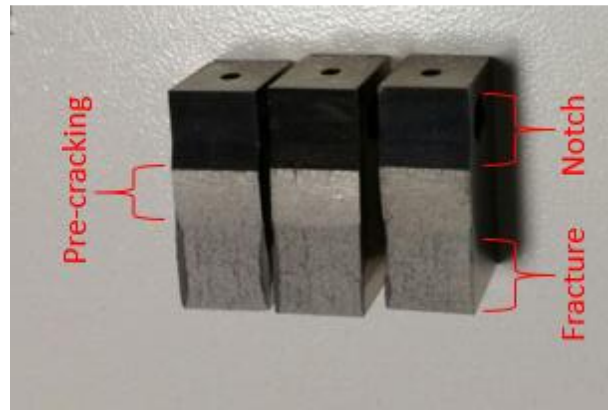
Crack front on fractured Ti6Al4V samples (stress relieved).
